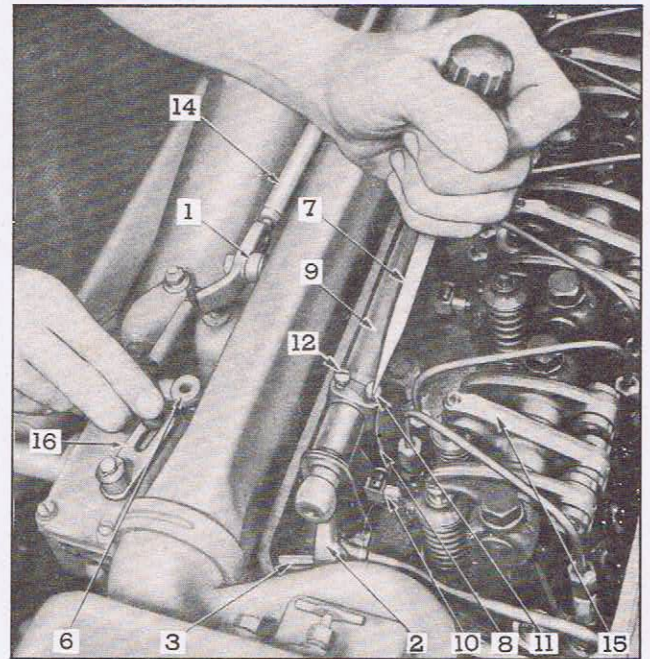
POSITIONING RACK OF NO. 1 INJECTOR ON "TWIN" ENGINE EQUIPPED WITH VARIABLE SPEED TYPE GOVERNOR.
